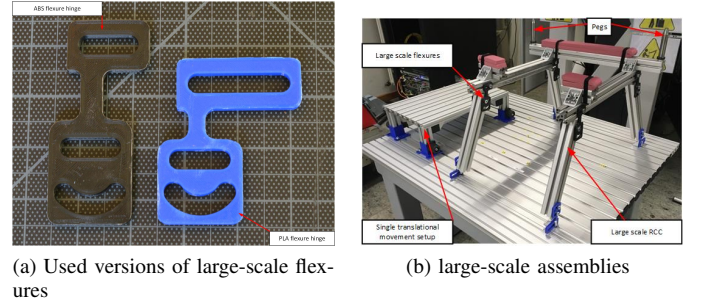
In (a), the older version of large-scale PLA-flexure is displayed. The ABS-flexure represents the current version with adapted geometry. In (b), assembly is shown.
